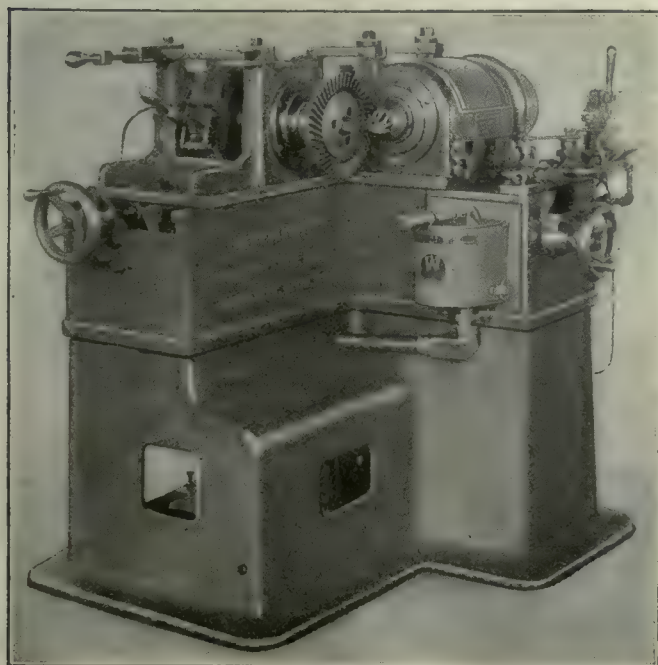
DAVENPORT BEVEL GEAR TESTING MACHINE
